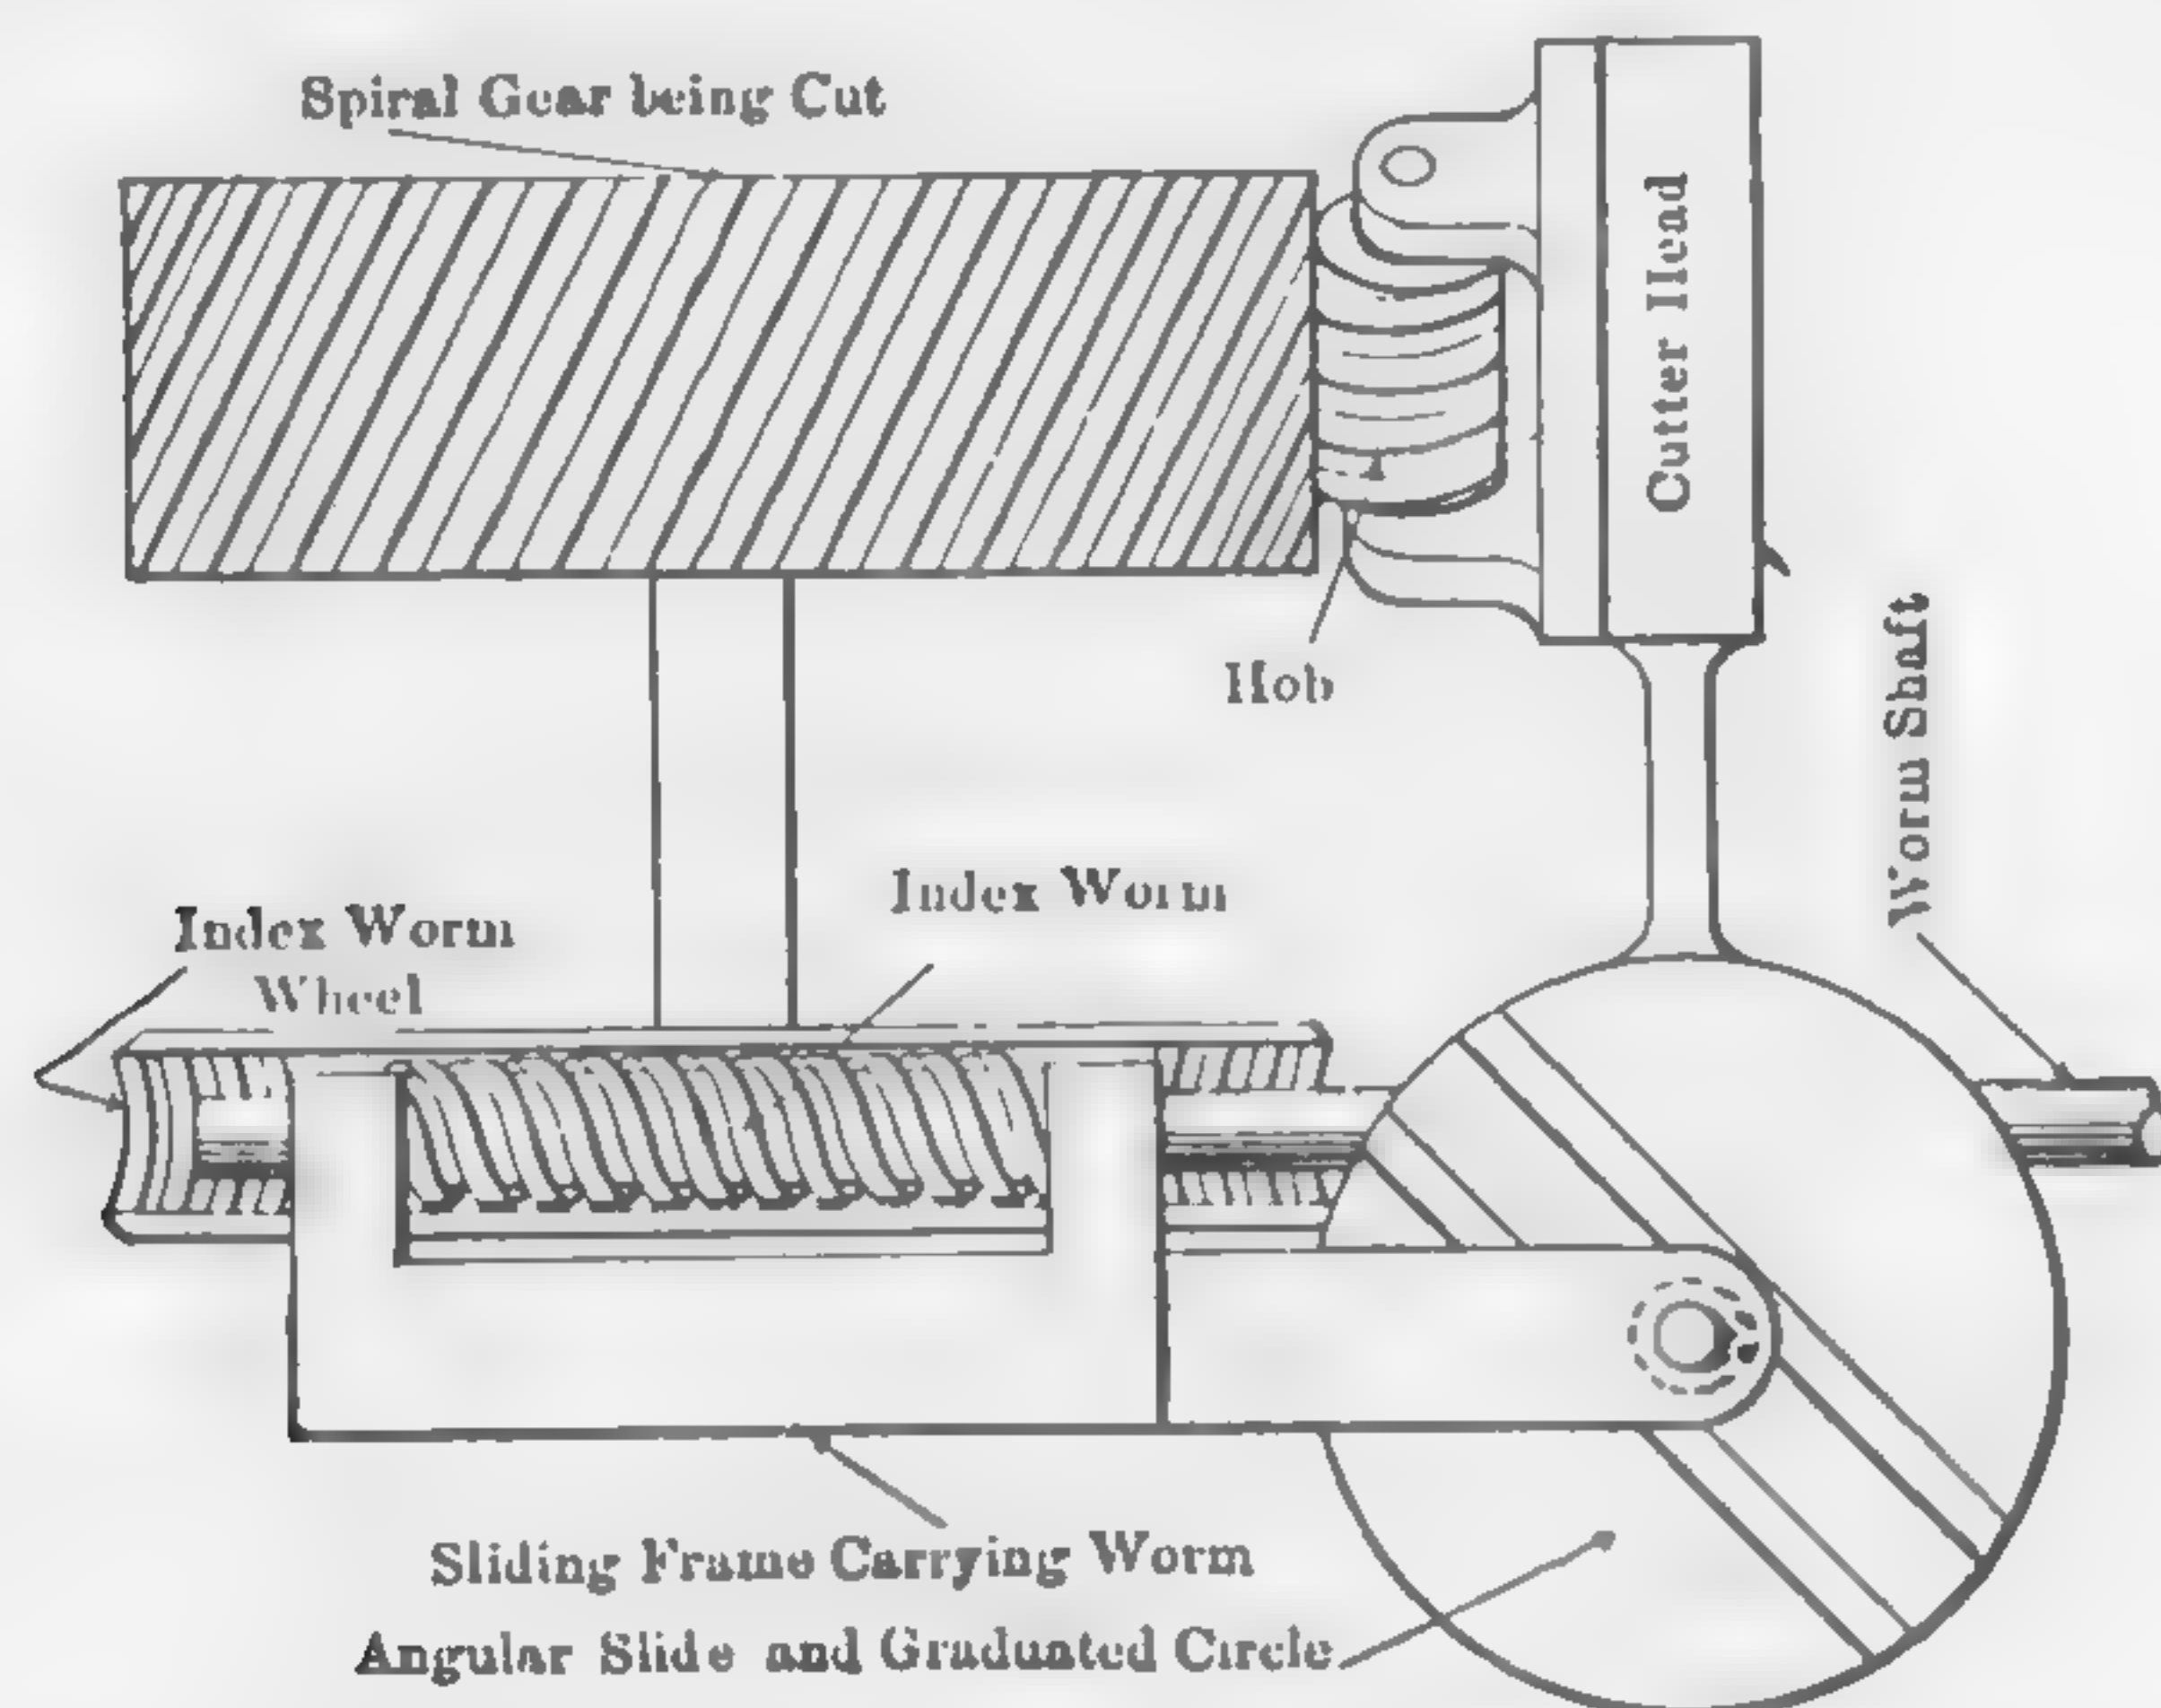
DIAGRAM SHOWING SPIRAL MECHANISM IN DE LAVAL MACHINE (Flanders)
